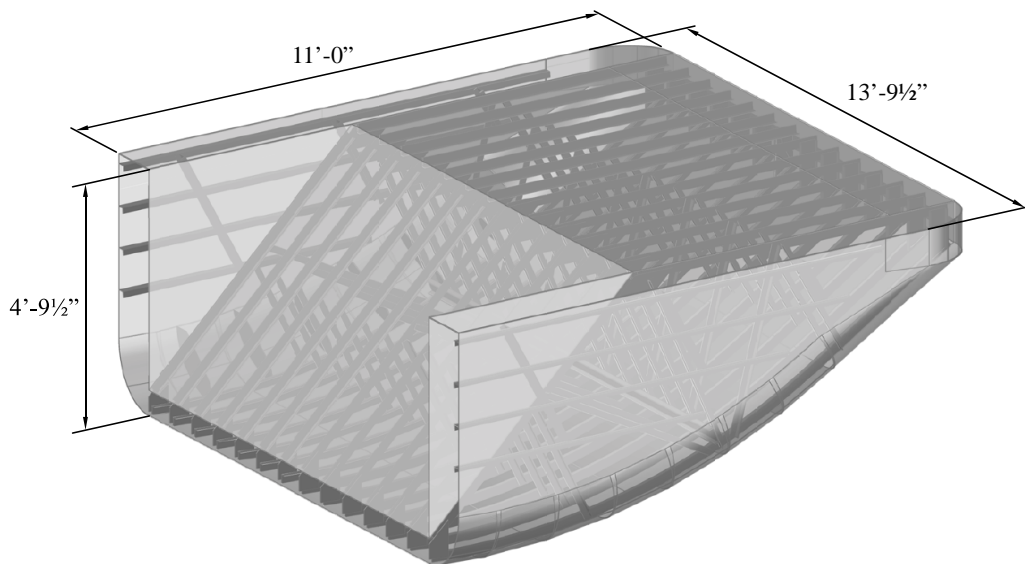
Rendering of reduced-scale barge bow specimen showing internal truss structure
